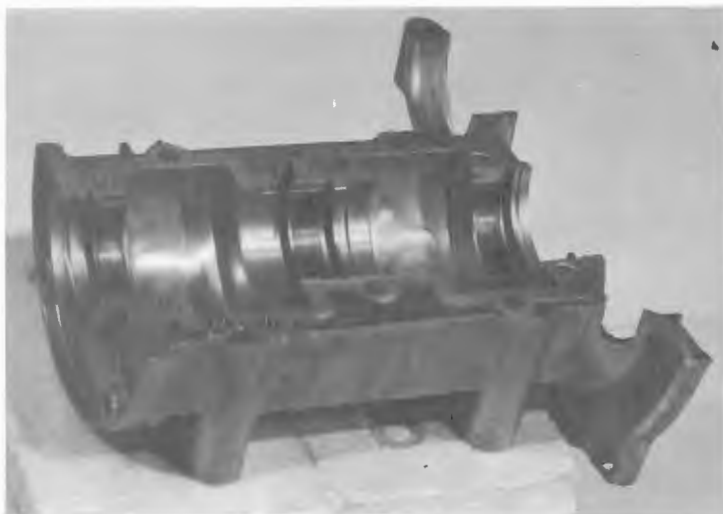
CRANKCASE LOWER HALF (WITH CIRCLIPS)
